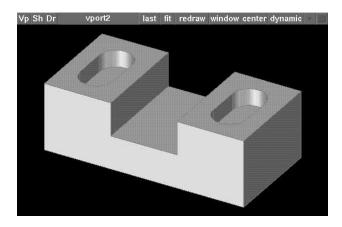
The part of Fig. 8 with two pockets, one copied. The system recognizes simple and compound bosses and pockets.
